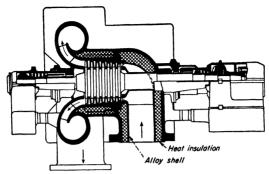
High-pressure turbine design for 25,000-kw 850- to 85-psia closed-cycle plant features a double easing. The rotor diameter is only 24 in.
